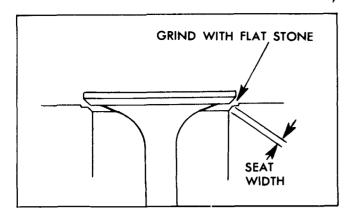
Valve Seat After Grinding with Flat Stone
